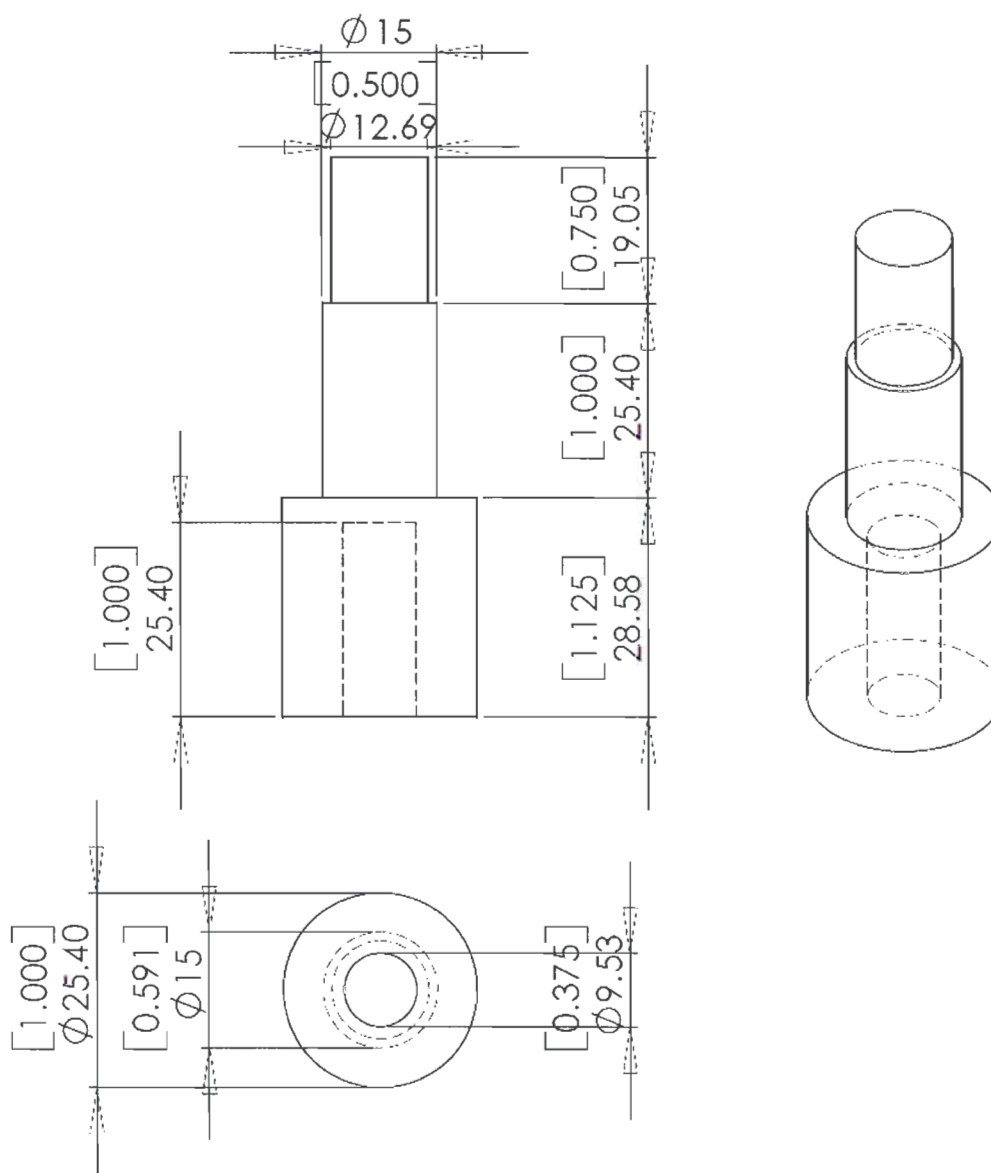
Dimensions of spindle shaft for Stage v1.0 DC motor.
